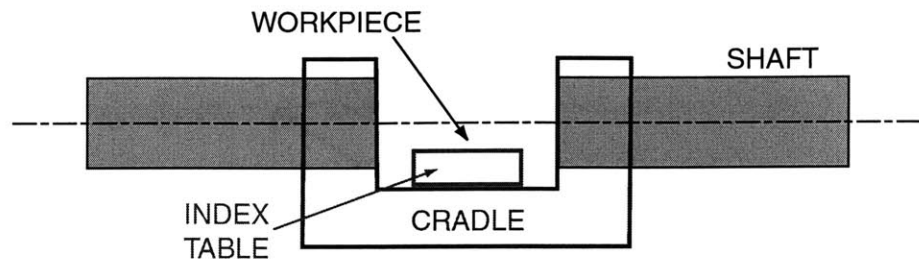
A cradle mounted on the rotary-linear axis holds a small index table and the workpiece.
